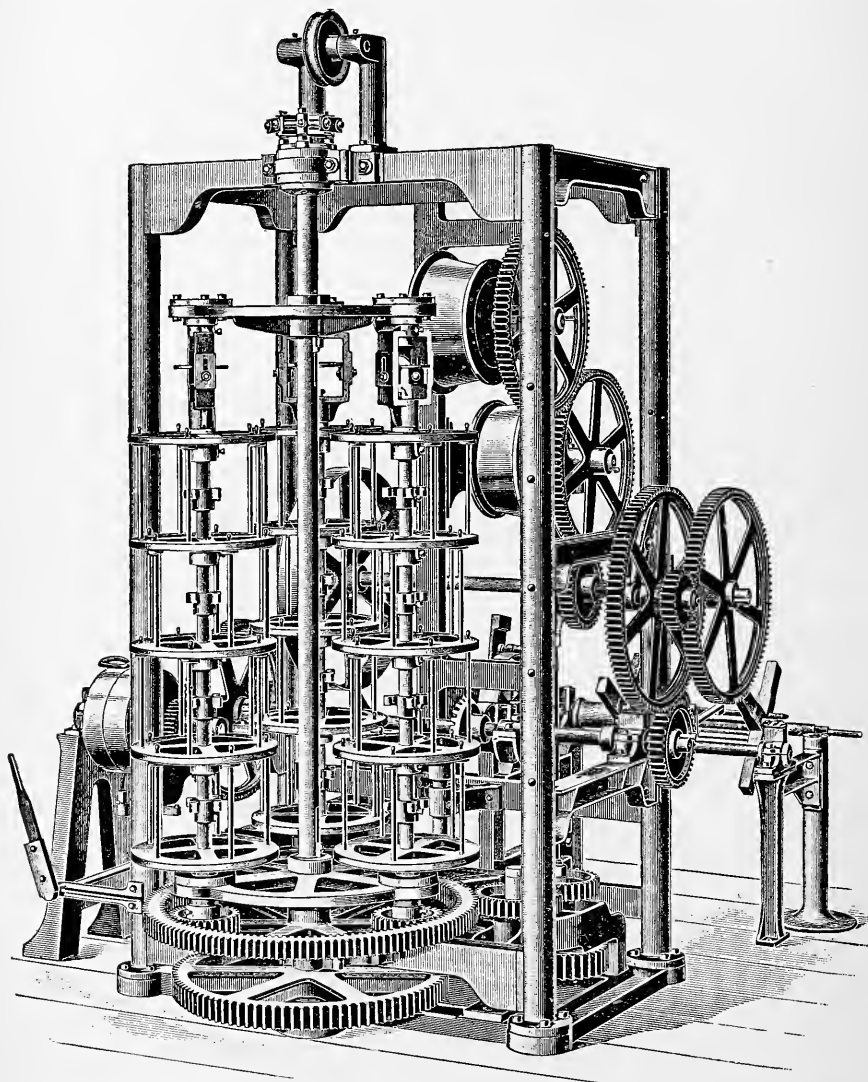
Sixty-thread vertical compound rope machine to form and lay rope from $\frac{3}{4}$ inch diameter to 1 inch diameter. (Made by The Watson Machine Co., Paterson, N.J., U.S.A.)
